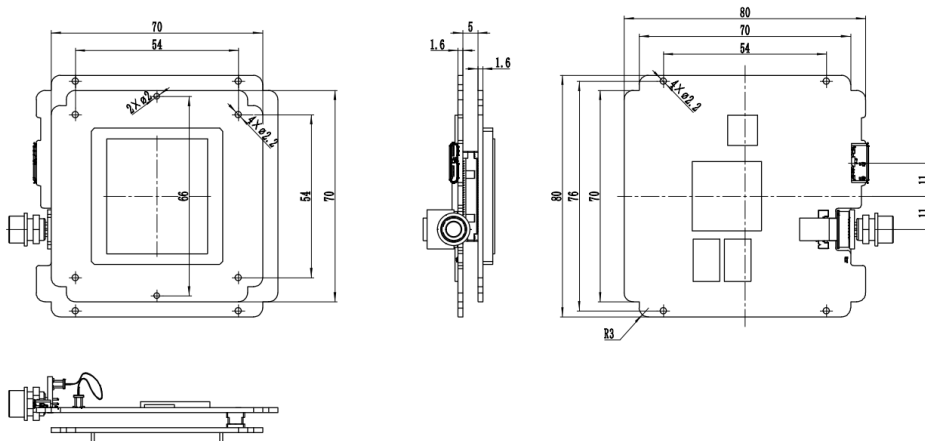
Dimensions of SCCXXX-AFU-EF circuit board (mm)
